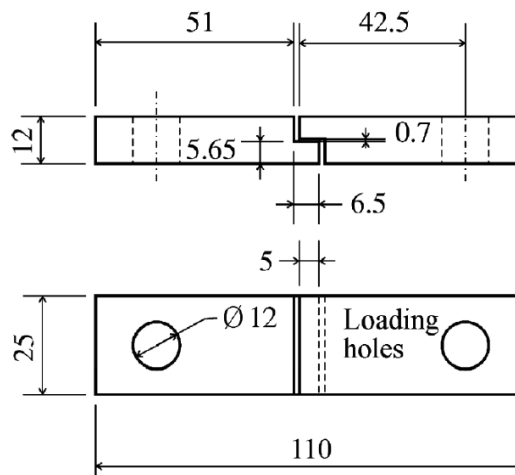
TAST specimen geometry (dimensions in mm) [23]
